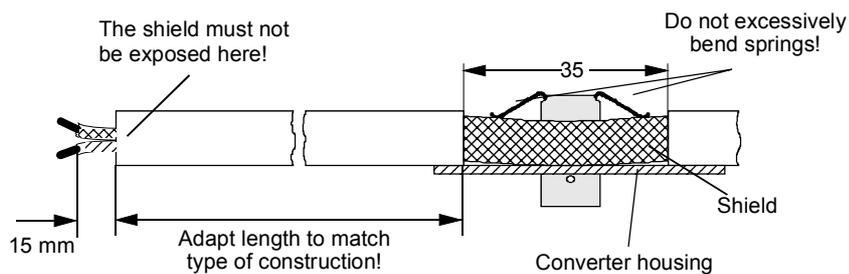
Removing insulation from the cable when shield clamps are used
